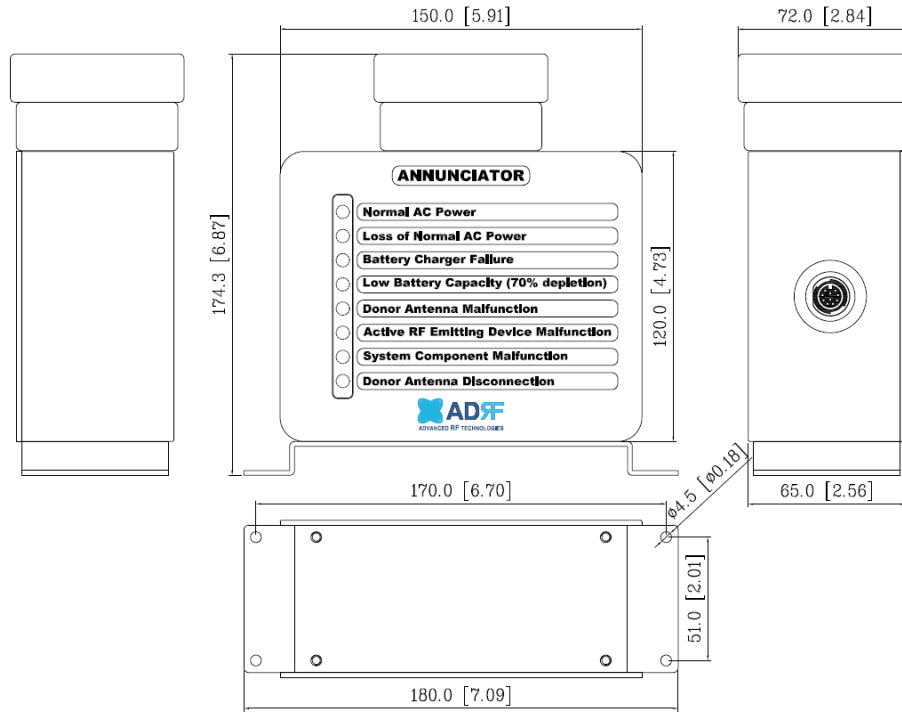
PSR-ANN Annunciator Mechanical Drawing
